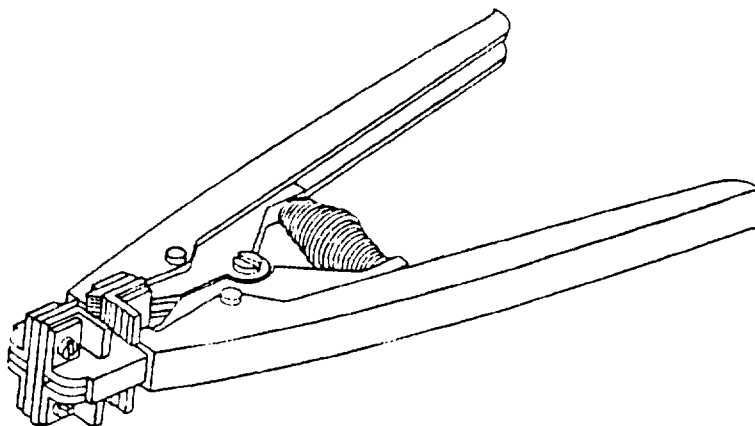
Mechanical hand wire stripper (see 4.9.2.3).
